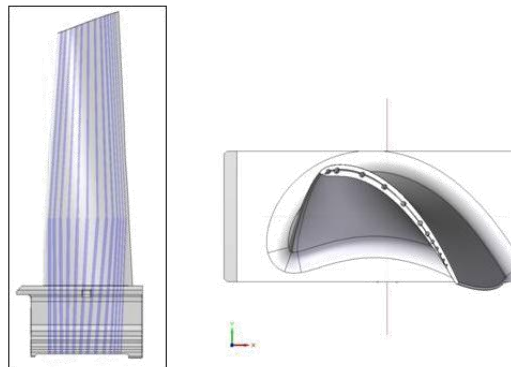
Blade views with internal cooling channels (left) and cooling flow exit holes at blade tip (right)
